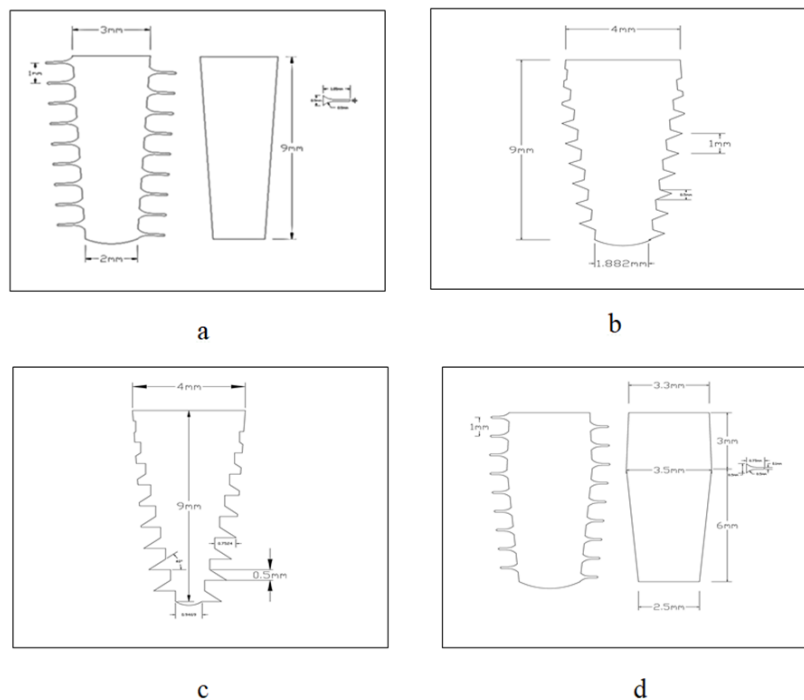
Implant designs and their dimensions, a: Fin Thread,b: V-shape, c: buttress, d: Modified Fin Thread.
